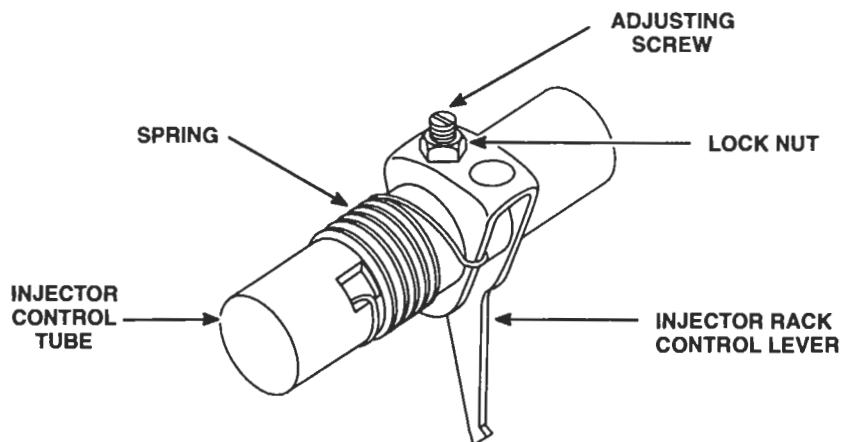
Injector Control Tube and Rack Lever (Spring-Loaded)
